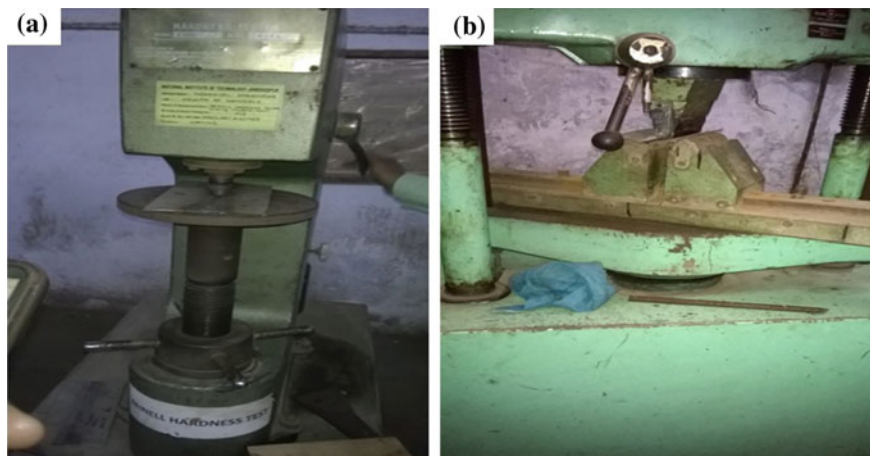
a Brinell hardness machine and b bend testing machine with welded specimen
